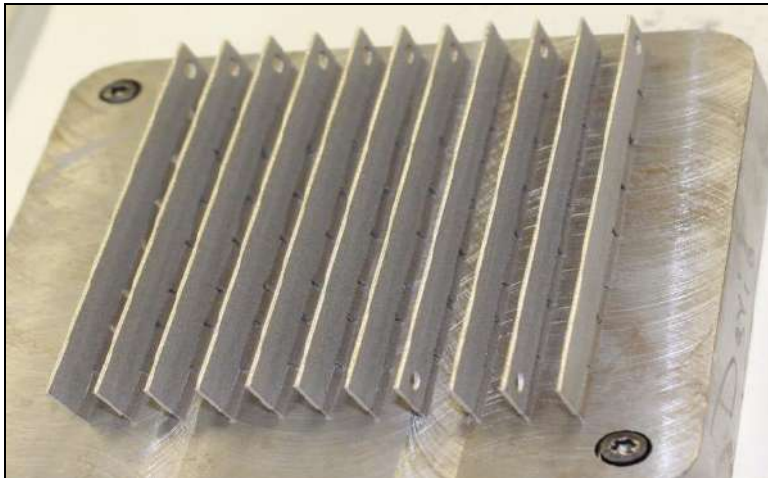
Shows the fatigue samples fabricated by SLM(125).
